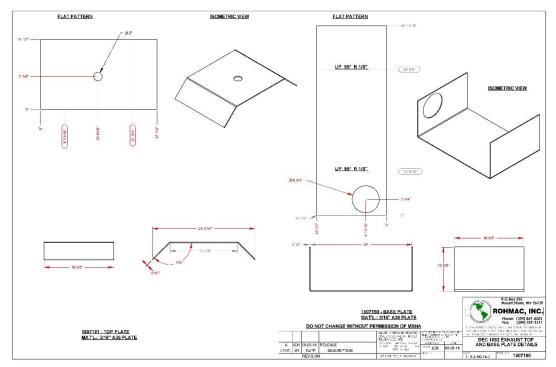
Revised Diesel Power Package Exhaust Base Plate Drawing
